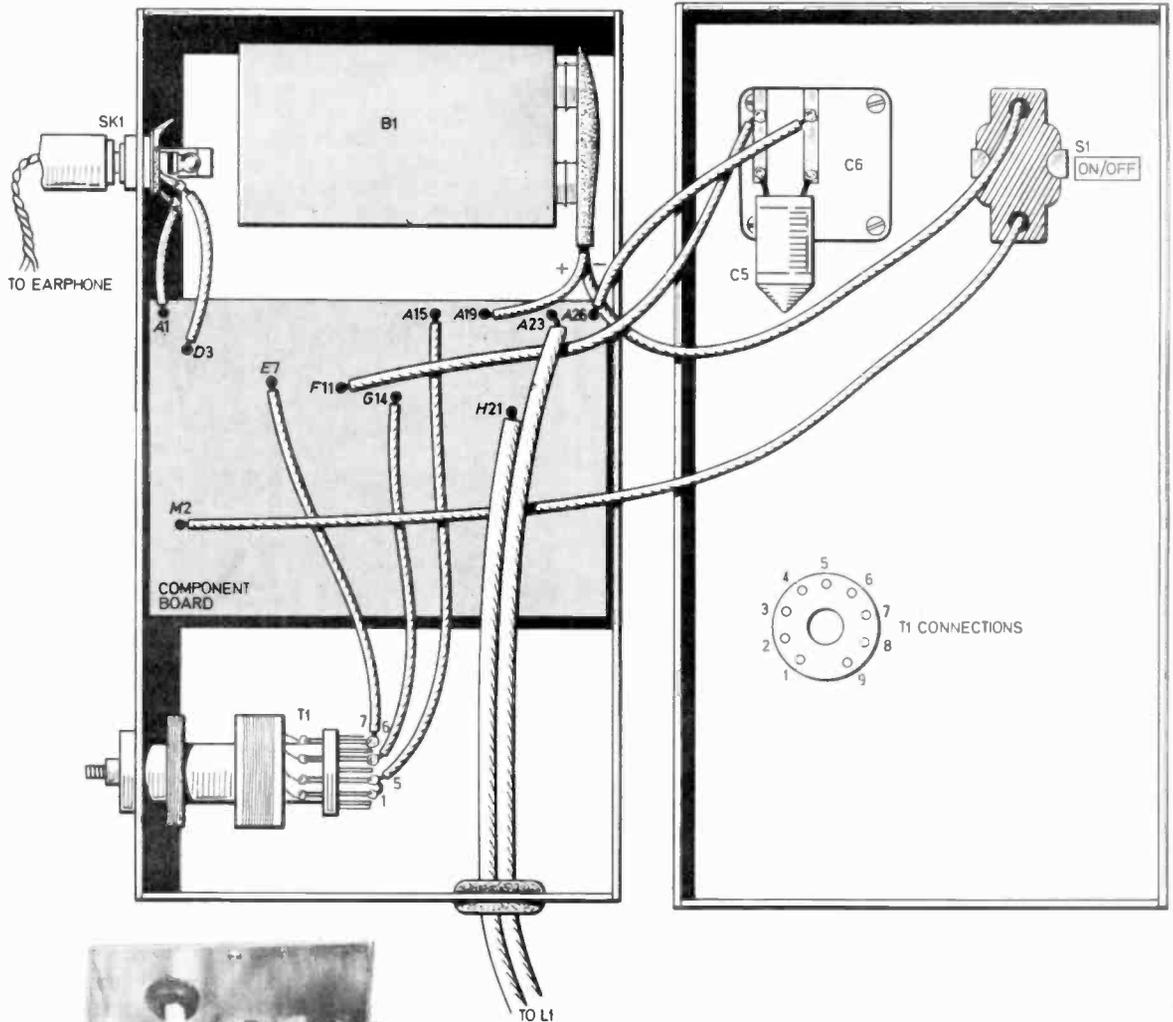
Layout and wiring of the completed component mounting box. Pin numbering for T1 is shown separately.
